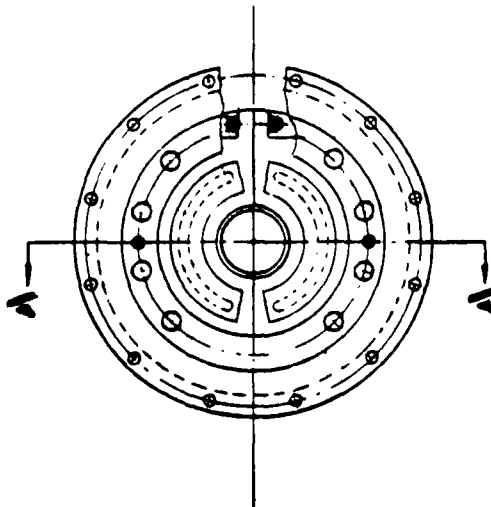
Hydrostatic Gas Thrust Bearing for Low-Pressure Spool
